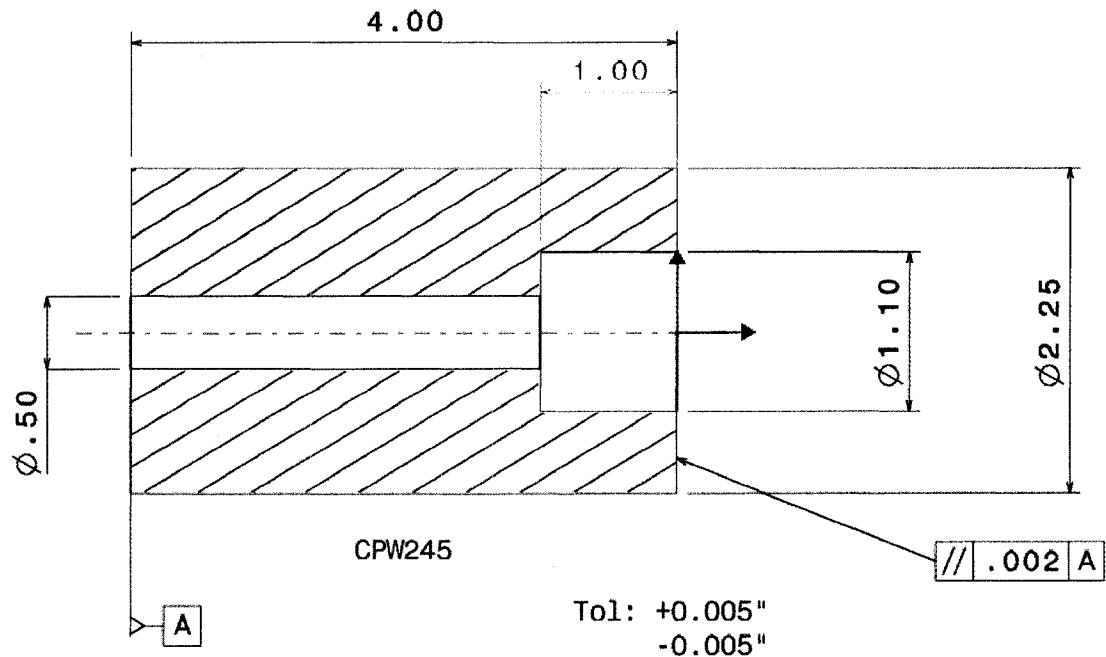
CPW245 test piece configuration for friction welding
